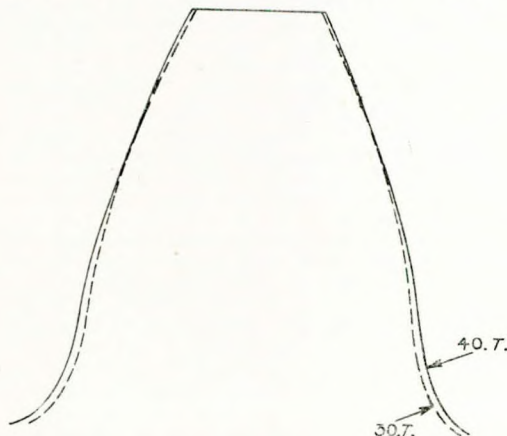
Tooth profile for 30-tooth and 40-tooth gears
